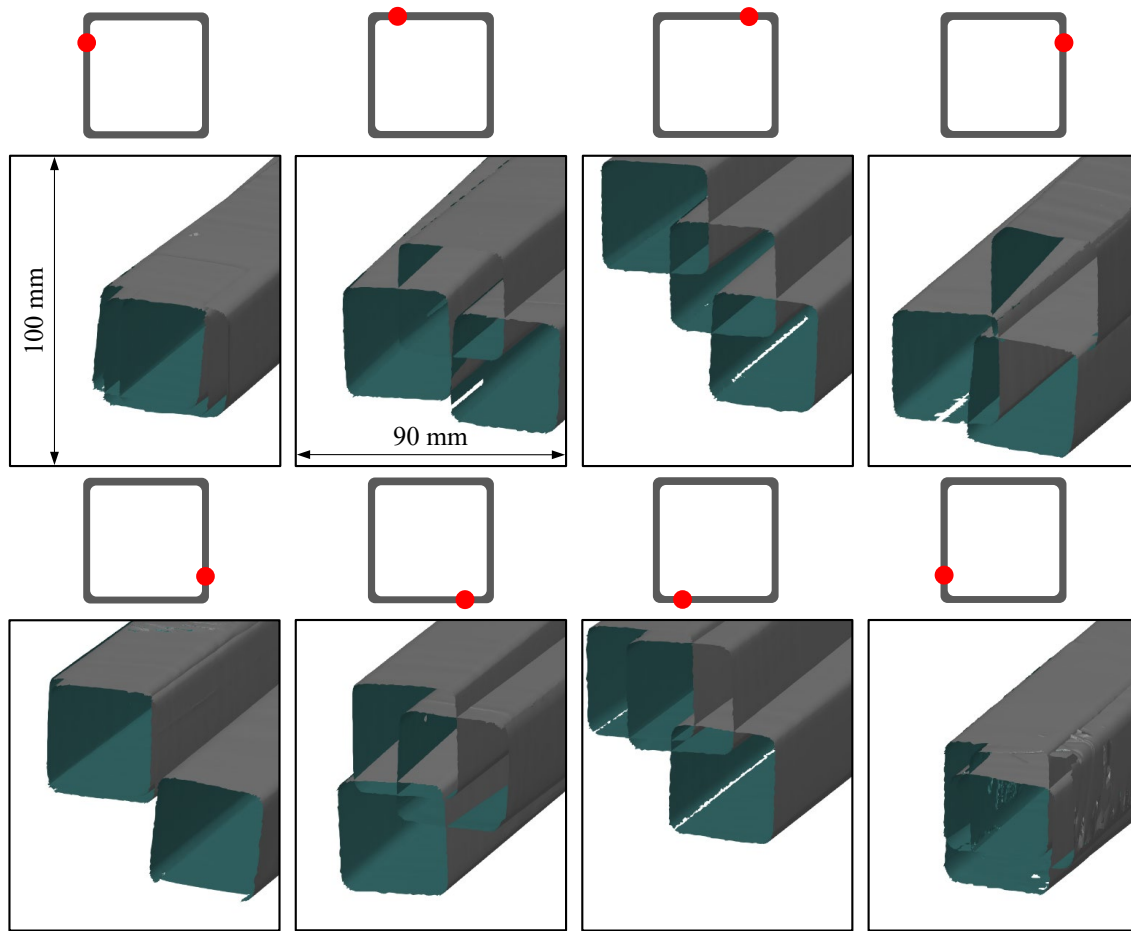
Visualization of the geometric deviation of the profile end sections depending on the weld seam position during the bending process.
